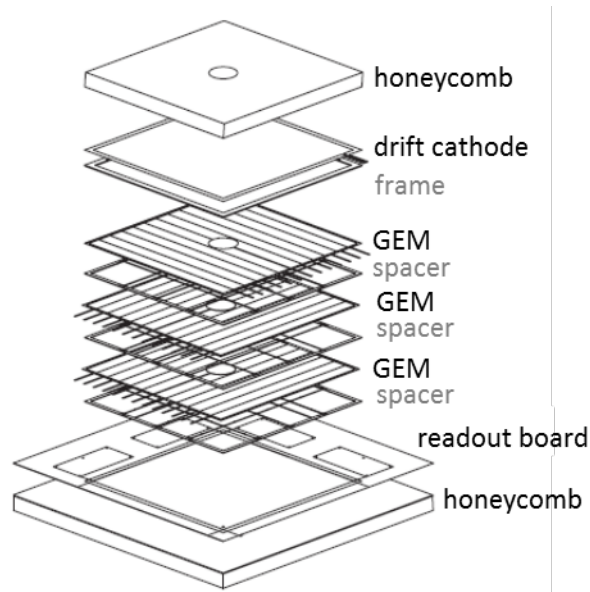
Exploded view of COMPASS triple-GEM detector [12].
